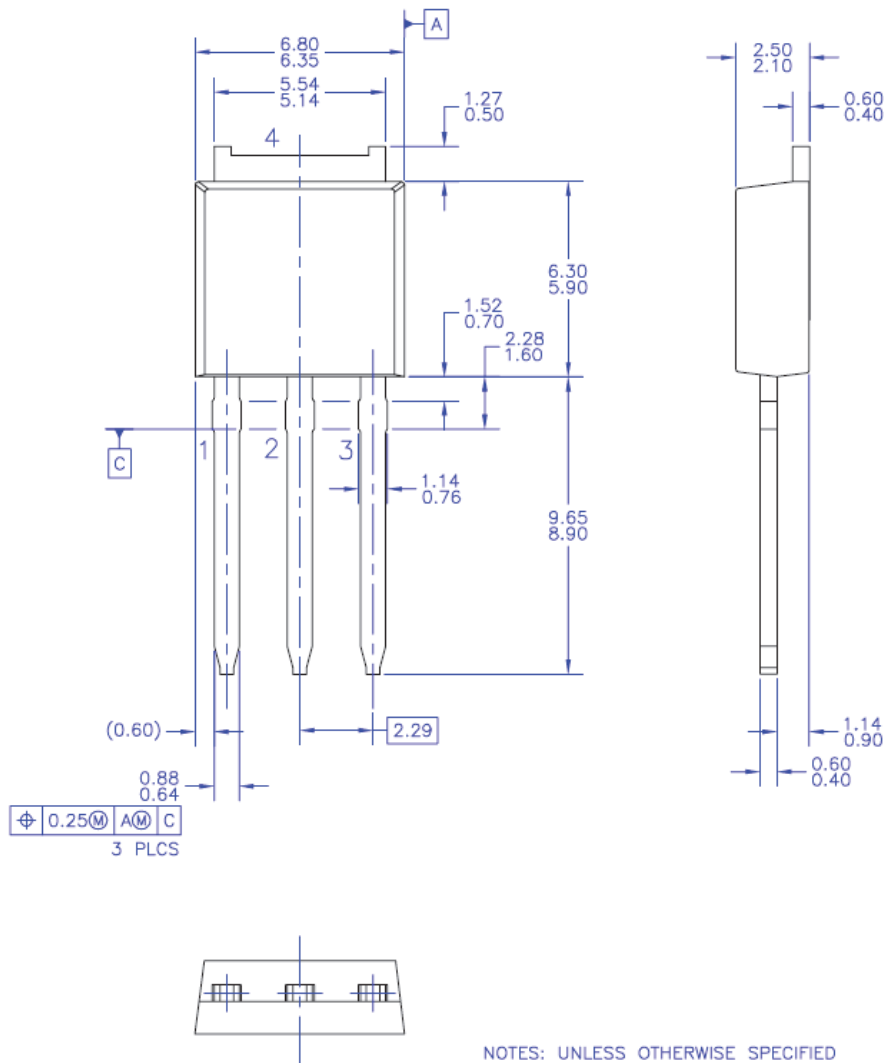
TO251 (I-PAK), Molded, 3-Lead
